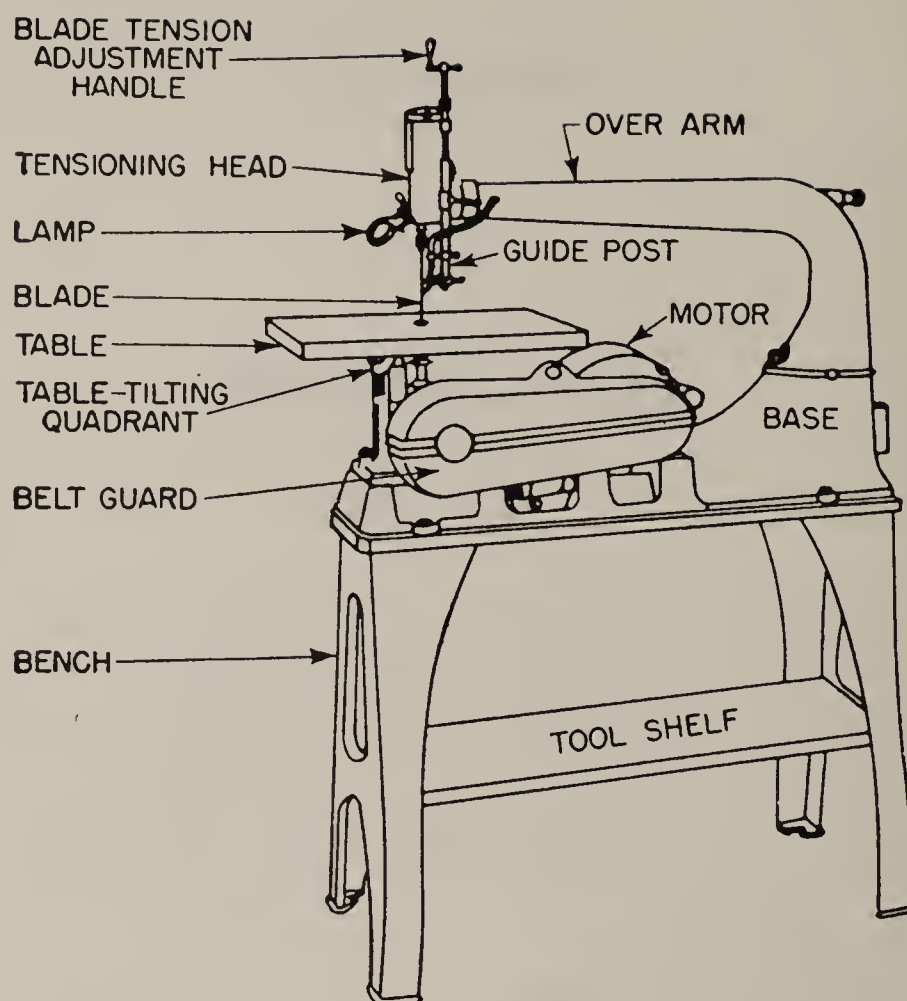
Component parts of a typical jigsaw. A jigsaw of this type uses a standard six-inch blade, but can accommodate any blade from 5 to 15 inches because of hollow vises and shafts. The cast-iron table can be tilted 45 degrees either way and is equipped with a graduated quadrant showing the exact number of degrees of tilt. The upper head adjusts on dovetail ways by means of a hand crank and knurled locknut. Blade tension is shown on a scale, and may be regulated for minimum vibration while the machine is running. The drive mechanism is of the reciprocating type with link and counterbalanced crank. The air pump is powered by the main drive shaft and keeps the cutting line clear at all speeds of the saw. The guides are completely adjustable for front and side sawing and are equipped with a soft refaceable blade support and a ring-type hold-down device.
